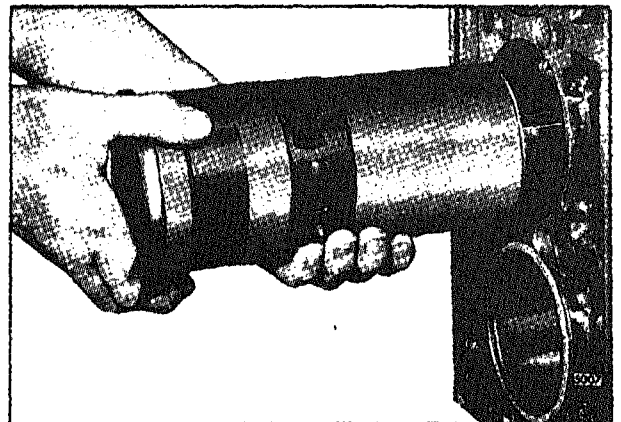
Installing Piston, Rod and Liner Assembly in Cylinder Block
